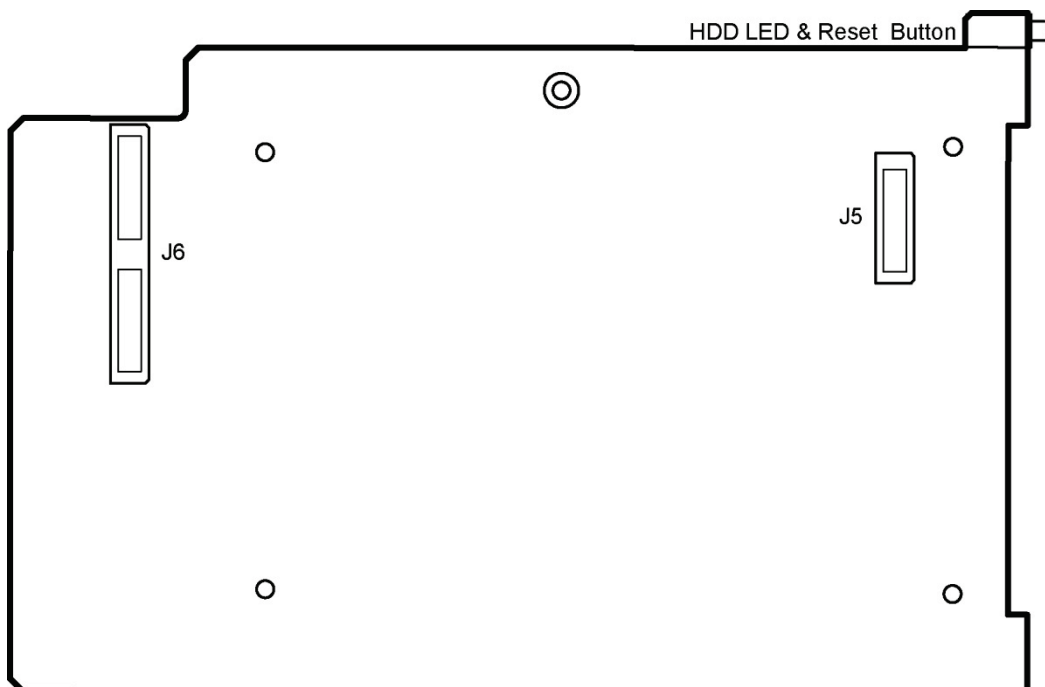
MMEXT-XMC02 Module Layout for 8HP Board Version (Bottom View)
